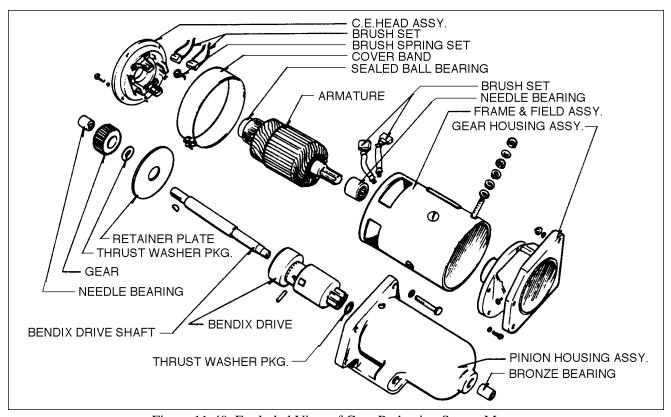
Exploded View of Gear Reduction Starter Motor
